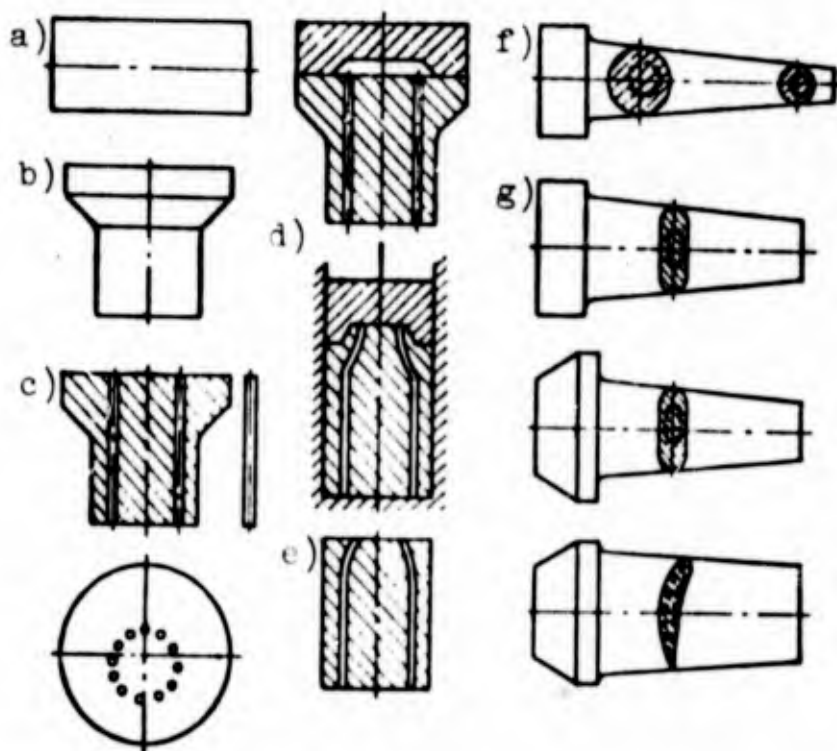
Flow chart of manufacture of a multichannel (honeycomb) cooled turbine blade. a) initial cylindrical blank; b) heading; c) working of holes and investing of them with filler; d) forging of mushroom-like blank into cylinder; e) segment of upper part; f) extrusion of cone blank; g) closed impression die forging for six transitions.
